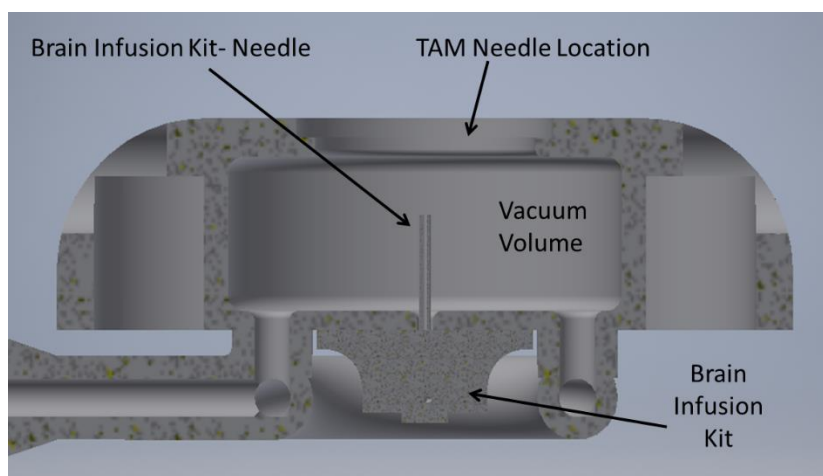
CAD assembly of a capsule with the BIN (cross-section).
